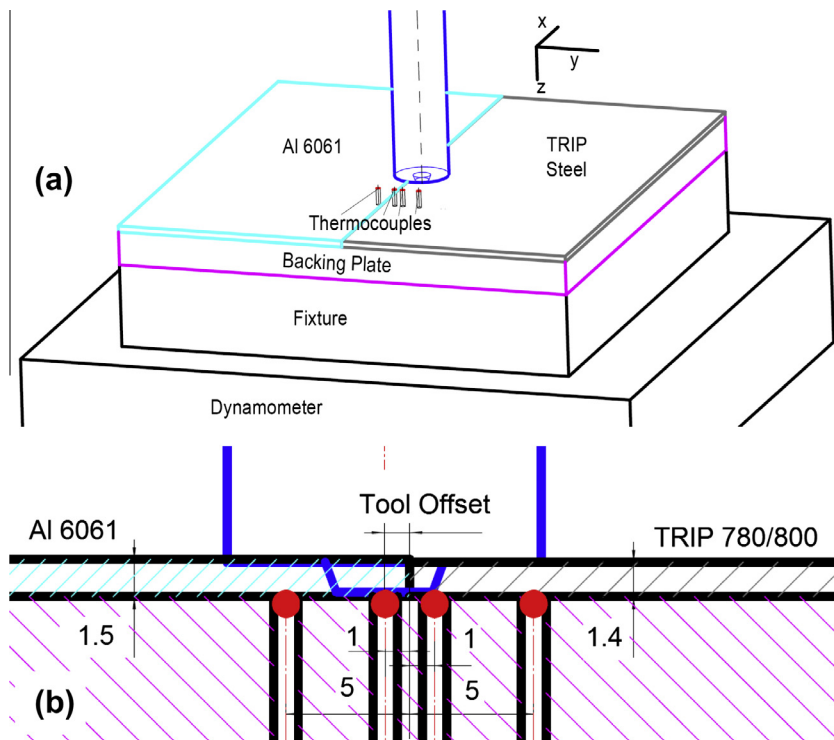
Schematic illustration of the FSW experimental configuration (a) axonometric view of the whole FSW experimental configuration; (b) cross-sectional view perpendicular to the weld line (unit: mm).
